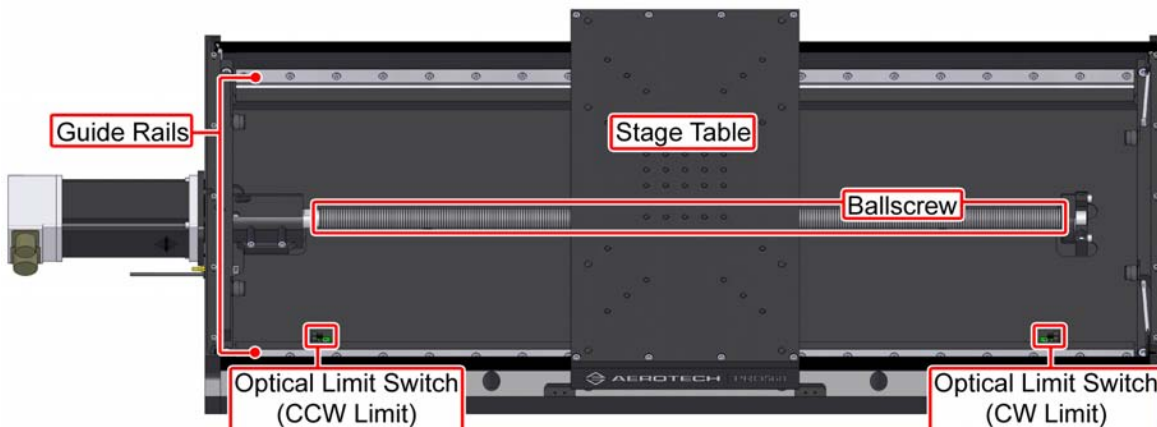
Internal View of a Typical Stage Showing Limit Switches
